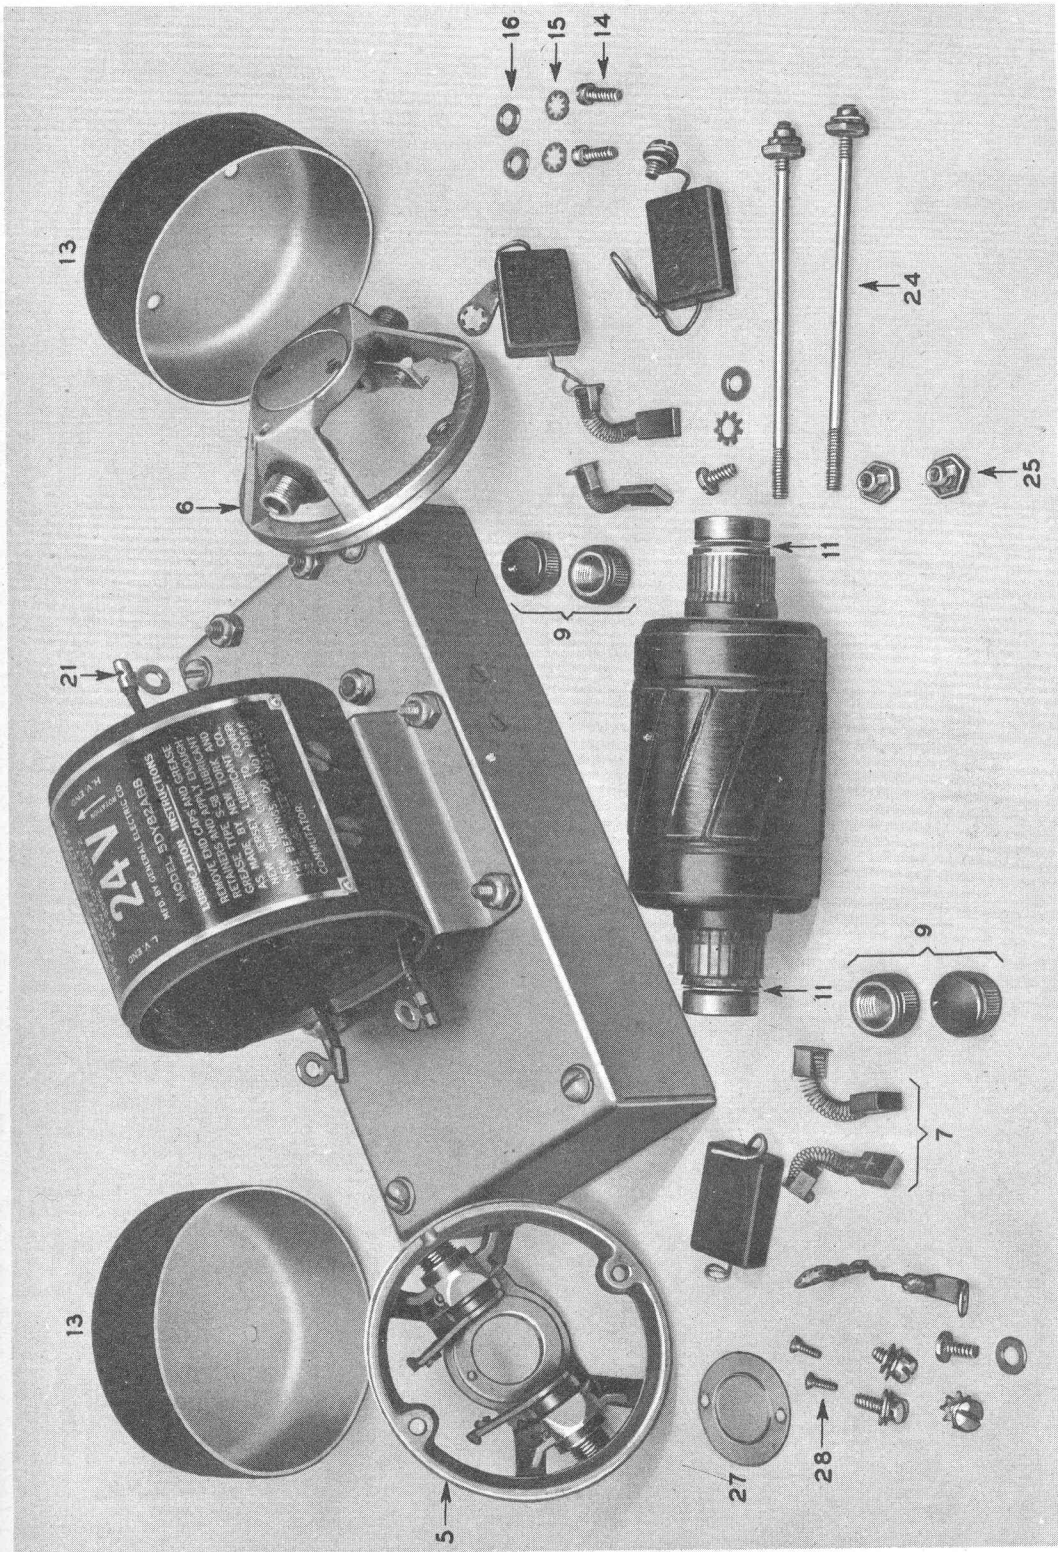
Dynamotor DM-34-(\*) or Dynamotor DM-36-(\*): Exploded View
